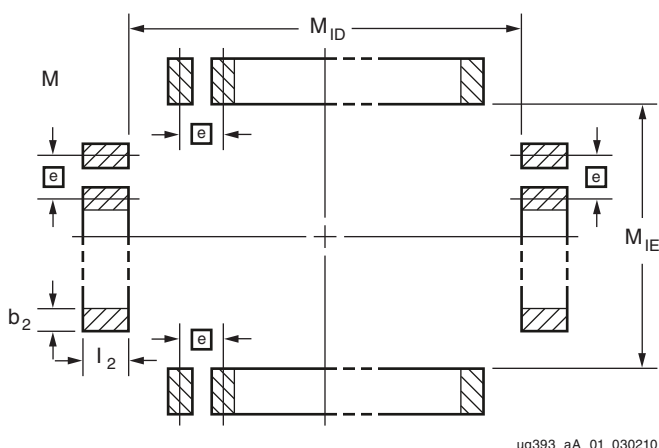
EIA Standard Board Layout of Soldered Pads for QFP Packages
